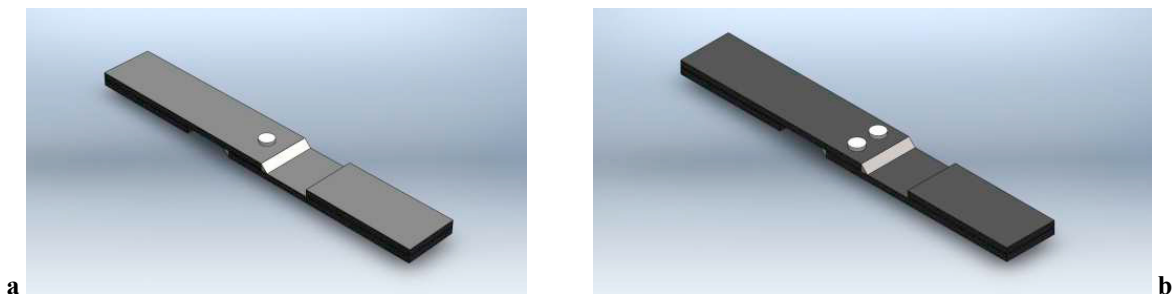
(a) Single-lap joint with one bolt; (b) single-lap joint with two bolts.
